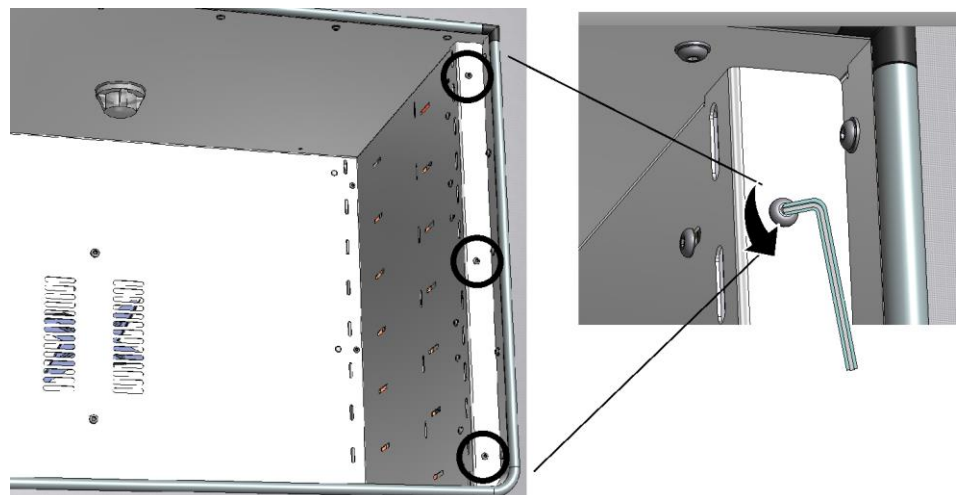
Unscrewing the screws on the side walls (similar to picture)
